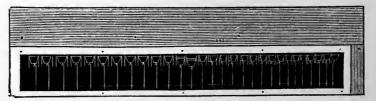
WIND-CHEST. Front-board removed, showing the pallets.
